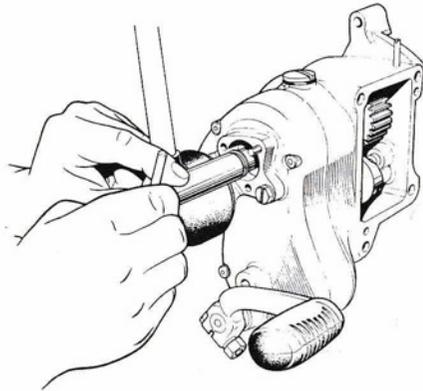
Assembling Spiralox mainshaft circlip with service tool 0710069.
